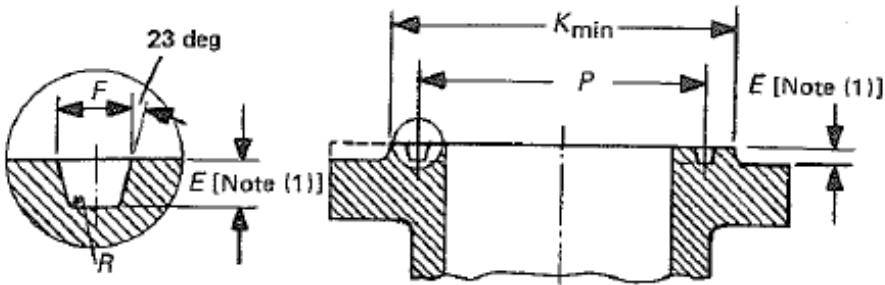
Legend, ring joint face dimensions (ASME, 2009).
